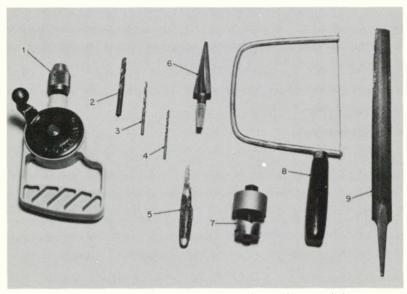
Basic hand tools needed for drilling and cutting holes.
